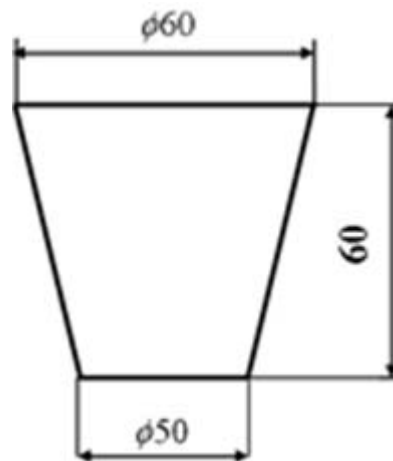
Stainless steel mould for ultrasonic casting (all dimensions in mm).
